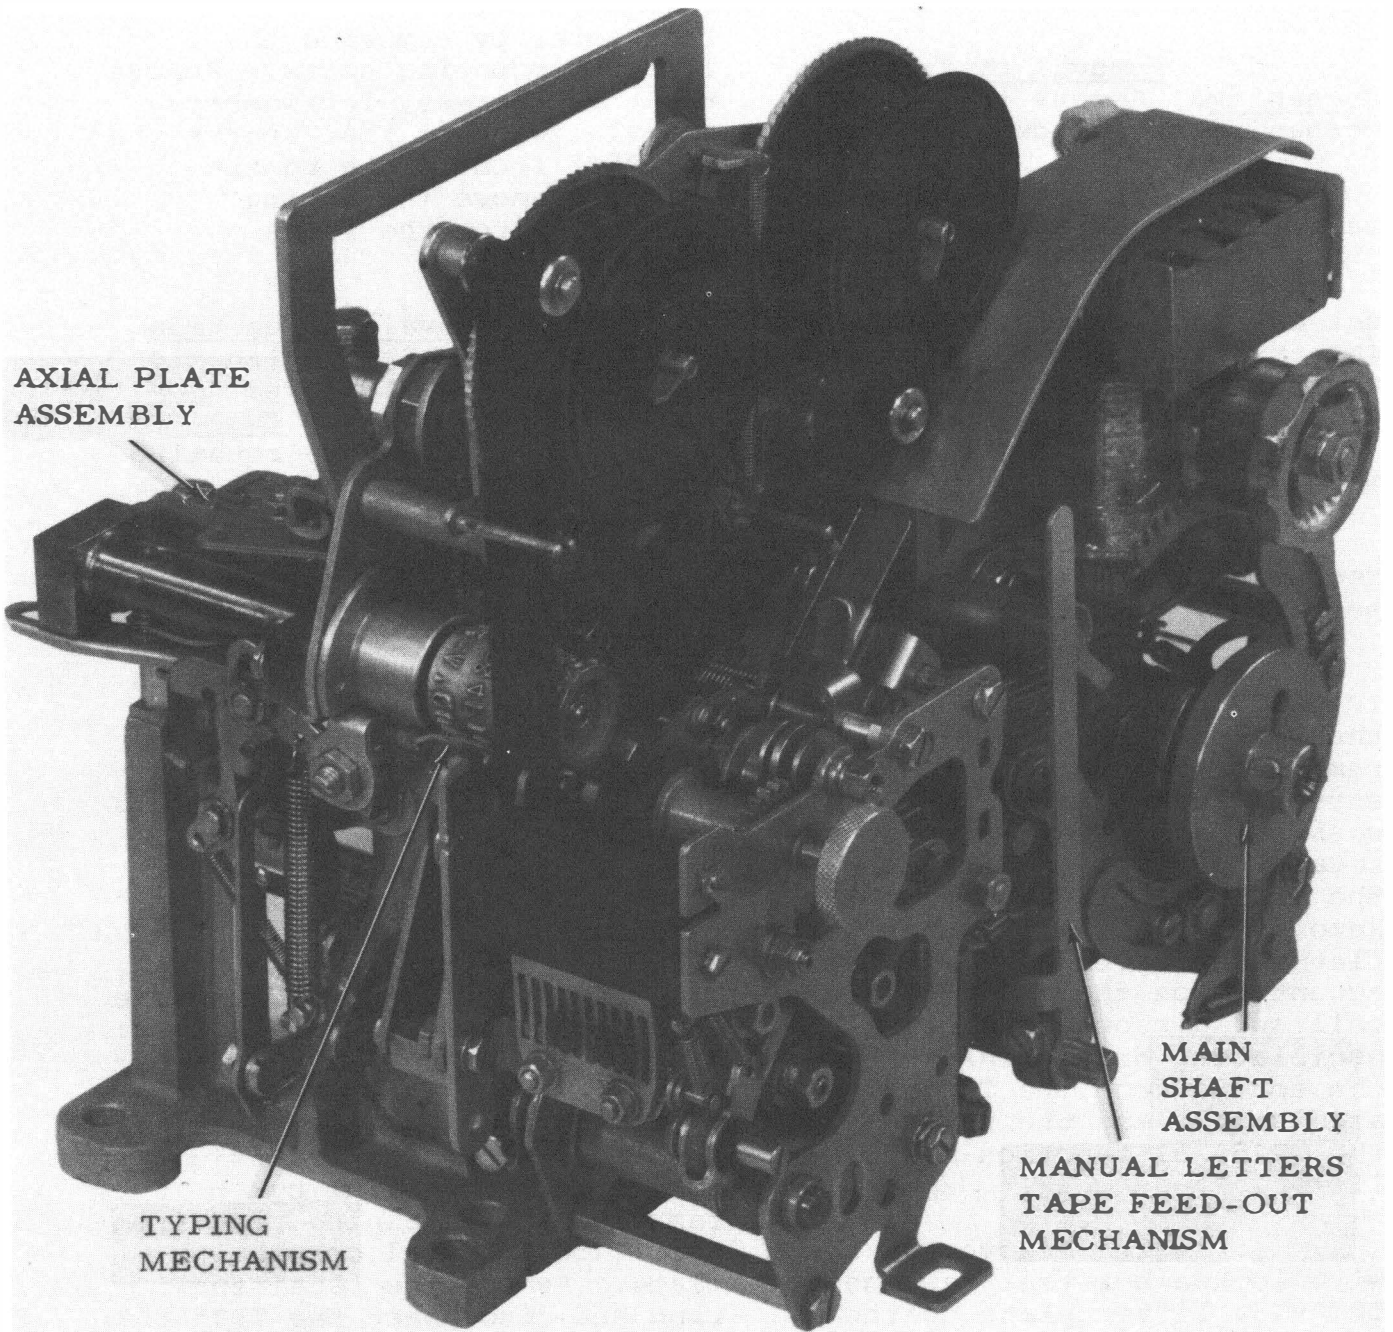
Tape Printer Unit with Manual Letters Tape Feed-Out Mechanism
